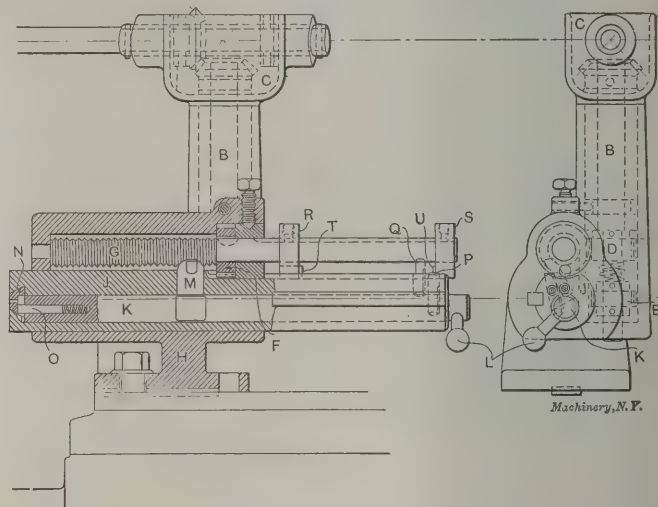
Construction of the Mechanism of Chasing Attachment.
